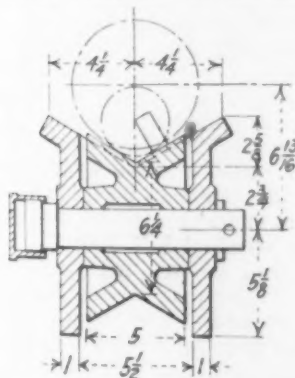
Cross Section of Ingot Carriage, Showing Roller for Delivering the Ingot to the Rolls
